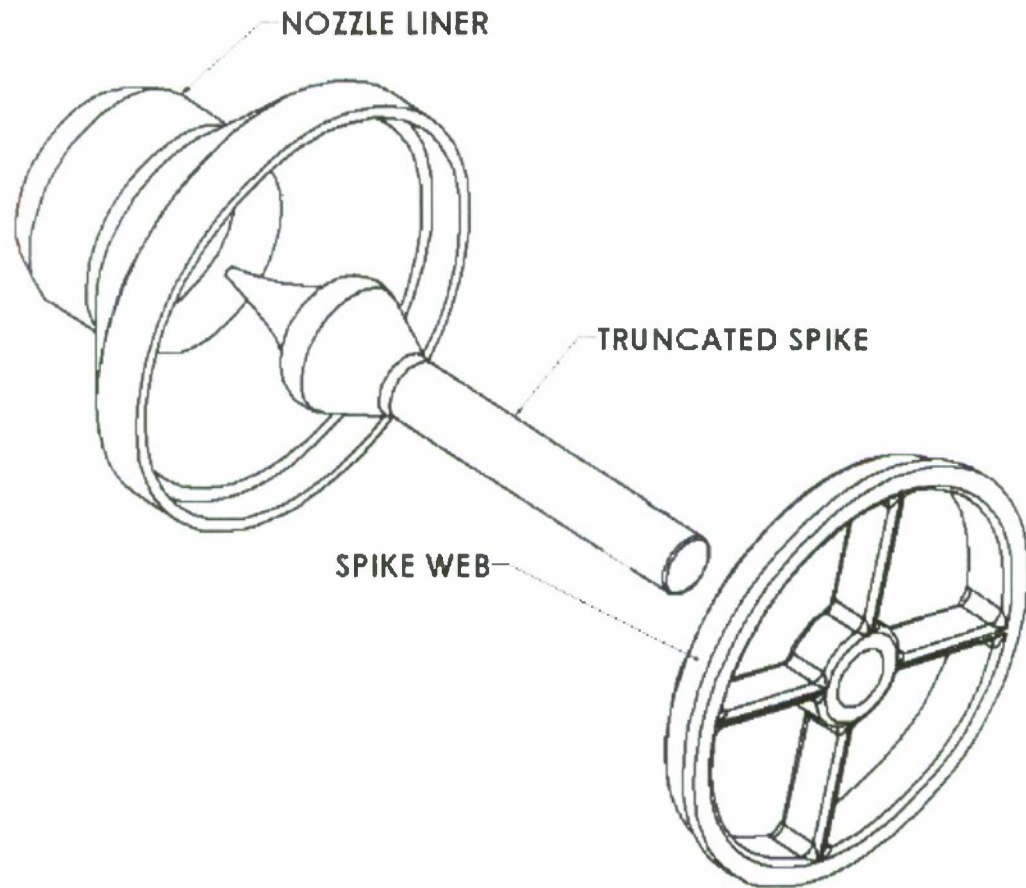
Exploded view of nozzle liner, spike, and spike web.
